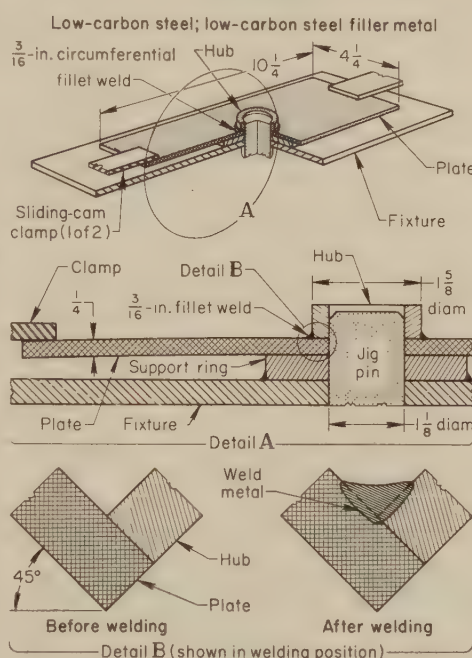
Typical adapting fixture for fillet welding of small circular parts using a rotary positioner
